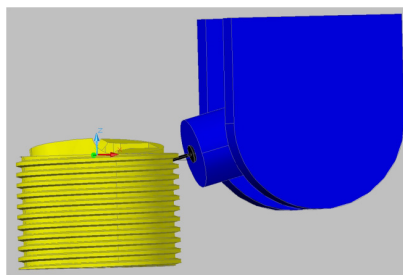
Machine head in working position on the flank of the trapezoidal thread
